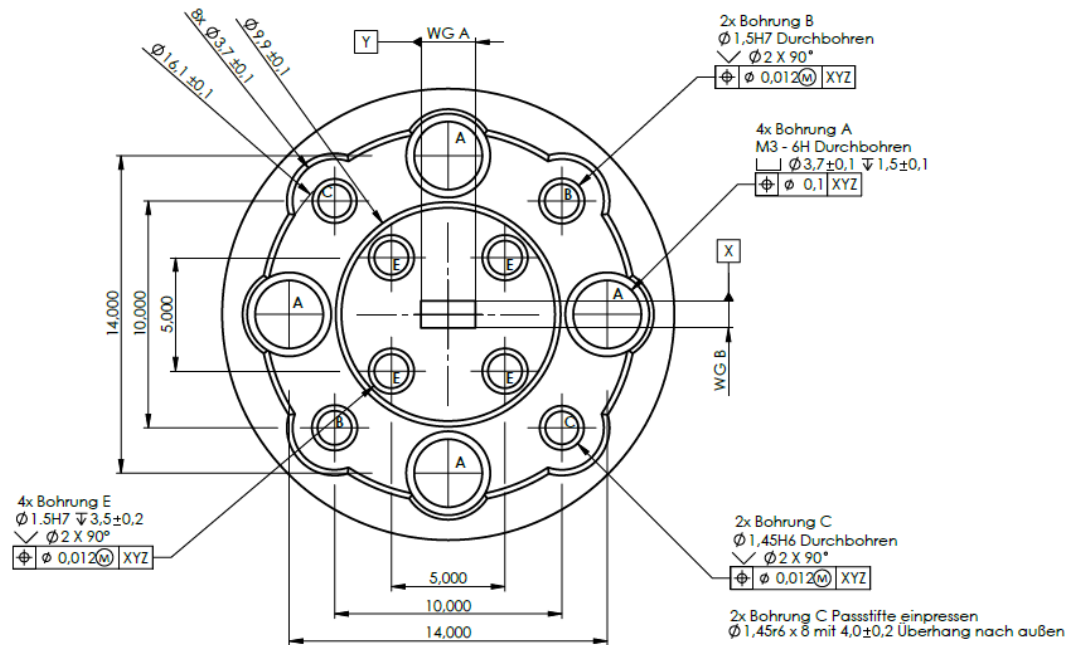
Drawing example of VNIIFTRI flange for RPG ZV-RU78, -RU118 & -RU178 with mechanical tolerances.
